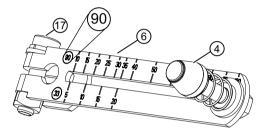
Long lever 6DR4004-8L with mounted carrier pin 4 and cylinder head screw 1
